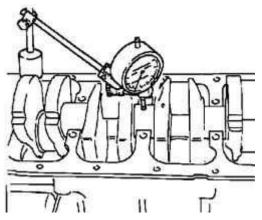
Measurement of roundness of the clearance of the crankshaft
